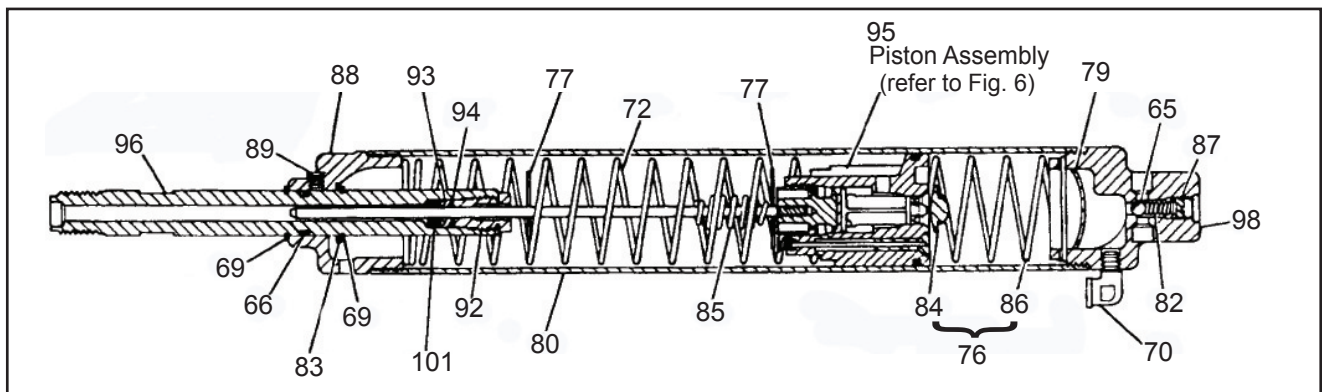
Parts Illustration for Model HW93731 -Air Hydraulic Pump Assembly
